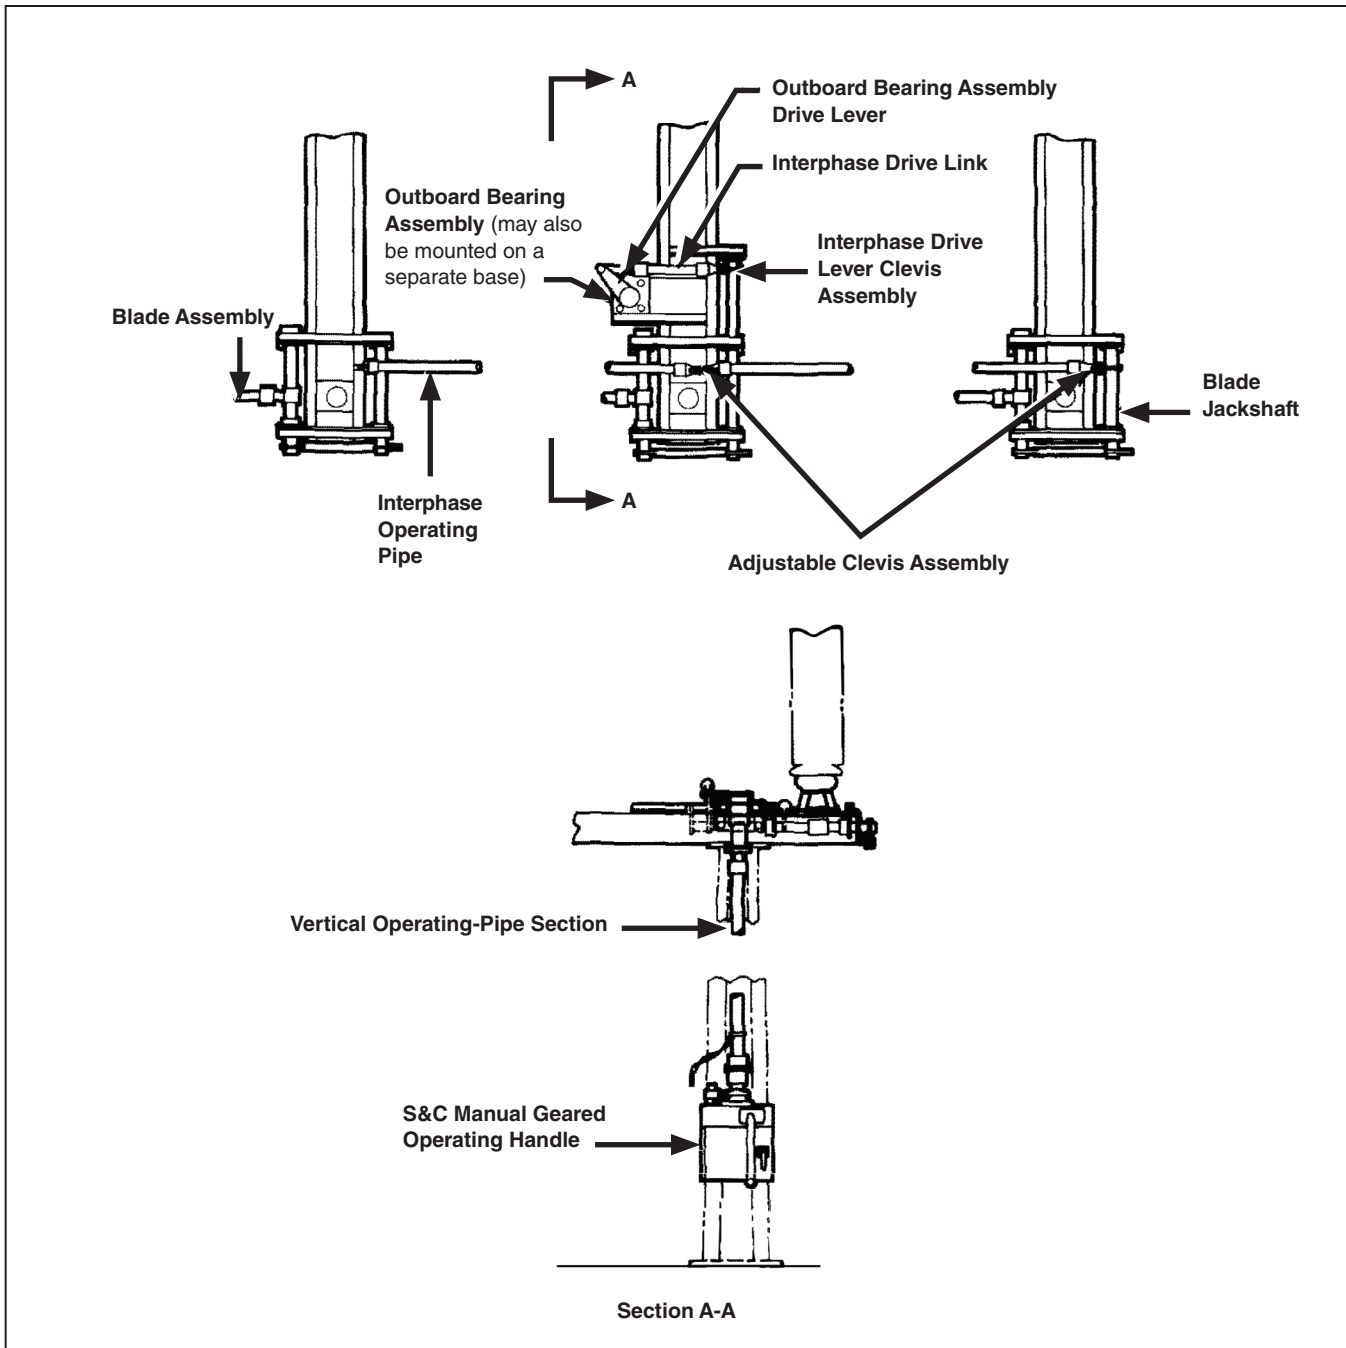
Typical grounding switch arrangement, shown for identification purposes. For the actual application, refer to the erection drawing.
